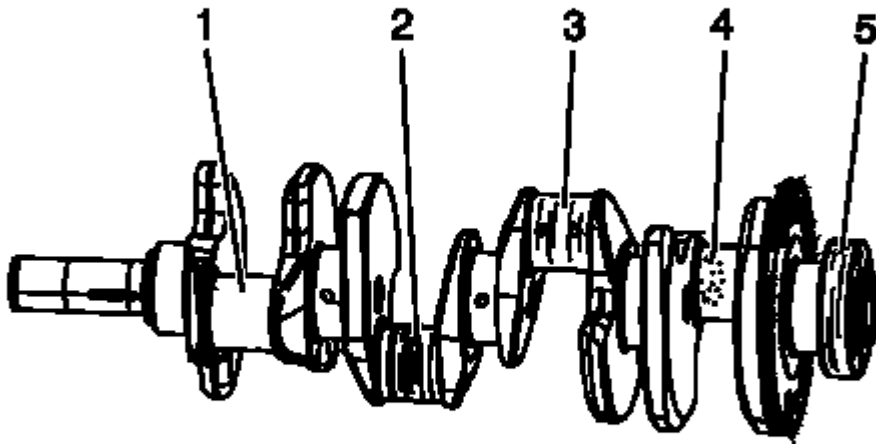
Inspecting Crankshaft Journals For Wear
